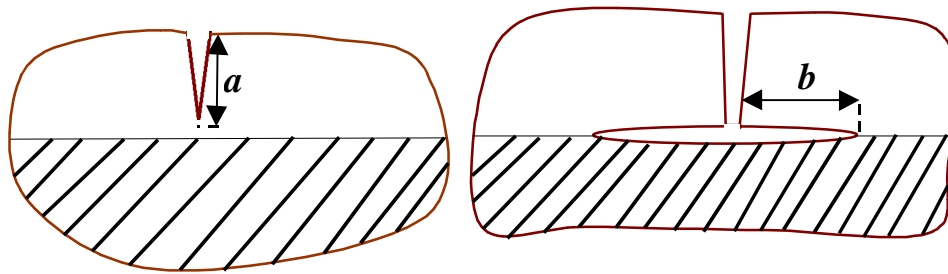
A schematic representation of overlay weld and possible crack locations.
